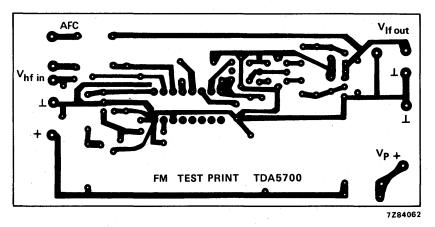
Track side of printed-circuit board; (test circuit Fig. 6).
